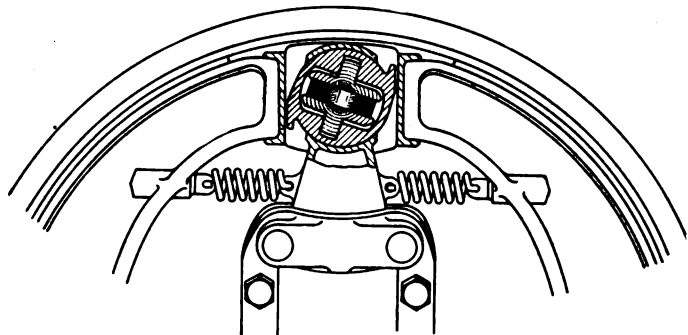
Ball universal joint in brake cam on Metallurgique.
